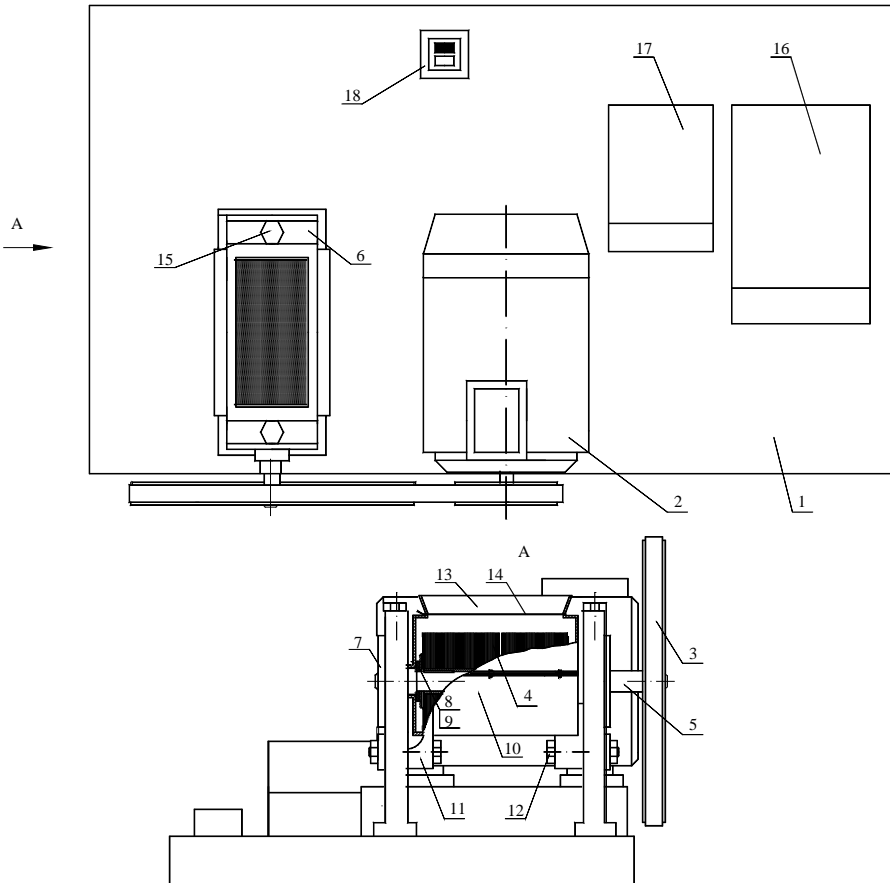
Experimental needle-cutter device: 1 – plate; 2 – electric motor; 3 – belt drive; 4 – needle-cutter; 5 – shaft; 6 – racks; 7 – bearing units; 8 – washers; 9 – nuts; 10 – loading camera; 11 – special lockers; 12 – bolts; 13 – loading camera hatch; 14 – shutter; 15 – adjusting bolts; 16 – device for measuring power; 17 – transformer; 18 – switch [own study]
